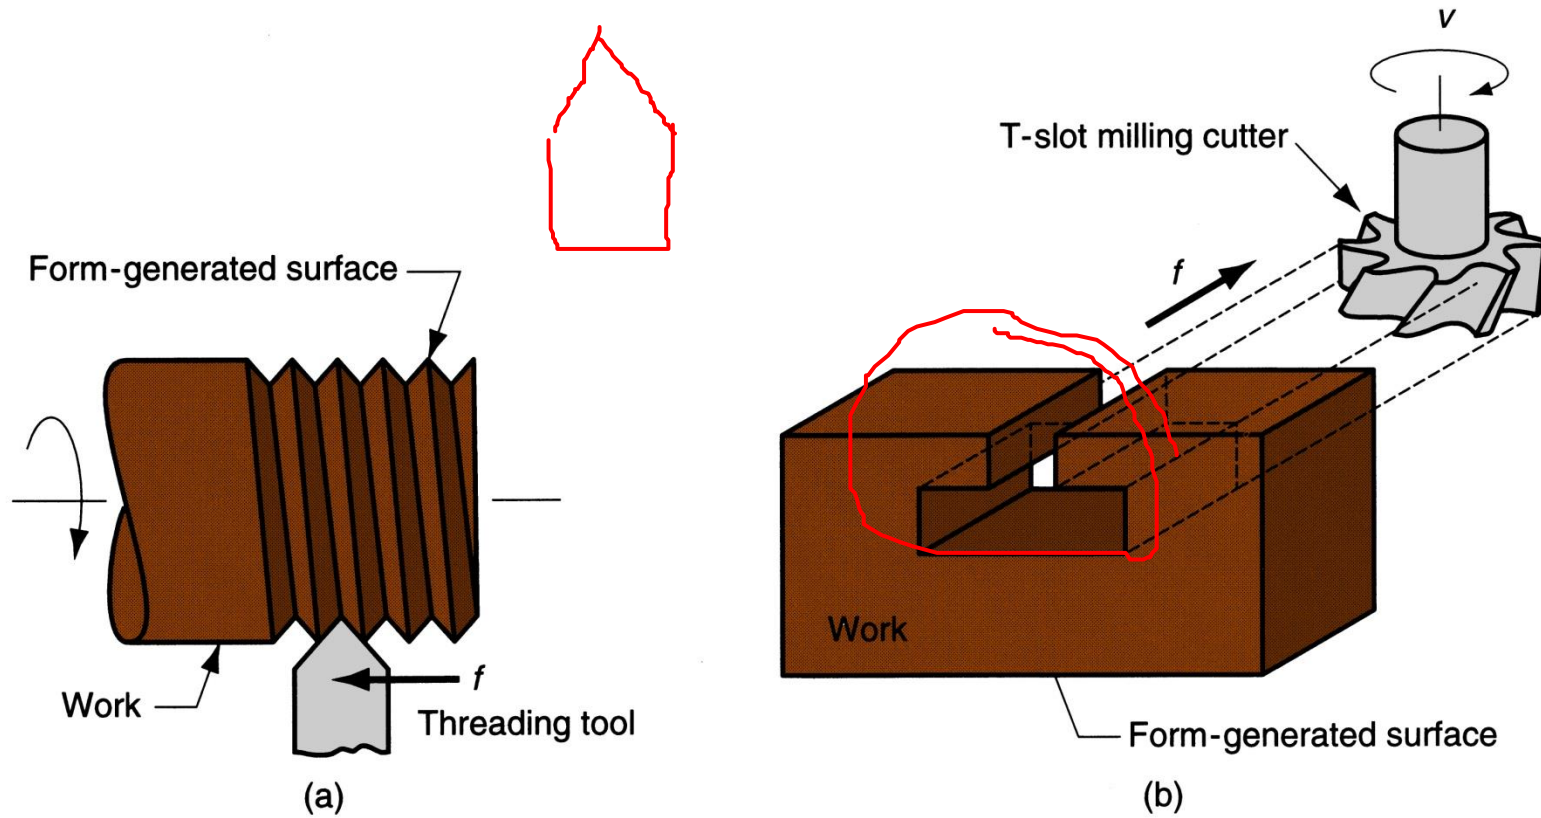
Combination of forming and generating to create shape: (a) thread cutting on a lathe, and (b) slot milling
